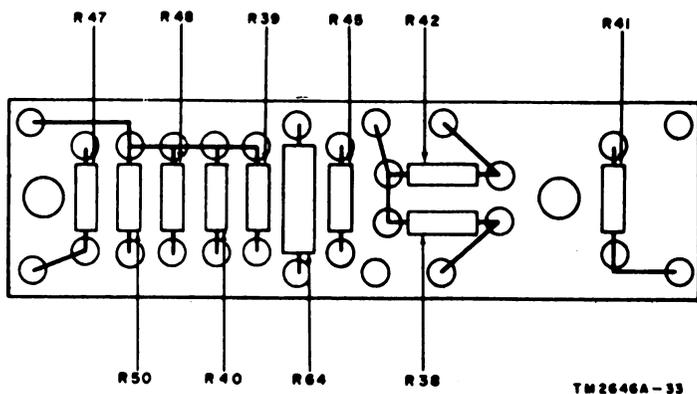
Terminal board assembly E2, bottom view, showing location of resistors.
